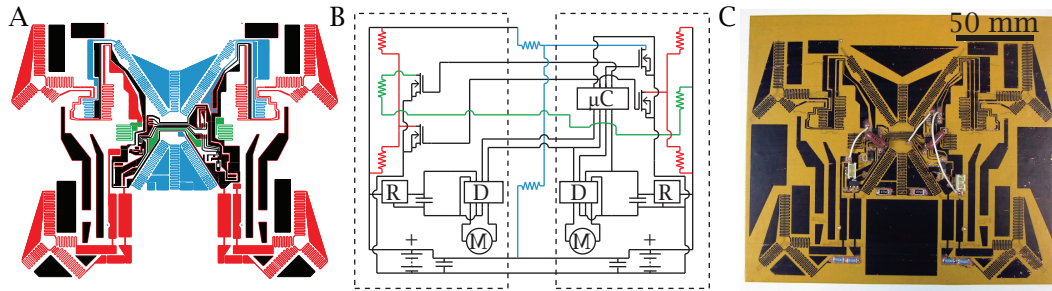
The electrical circuit of the self-folding robot. The crawling machine uses a flexible printed circuit board (PCB) integrated into the laminate to control both assembly and locomotion. (A) The trace pattern of the machine's PCB. Red, blue, and green traces indicate the current path during activation of the first, second, and third folding steps, respectively. (B) The machine's circuit diagram, including one microcontroller (μC), two motor drivers (D), two voltage regulators (R), two motors (M), two batteries, and four MOSFETs. (C) The flexible PCB layer of the machine, with all electrical components installed.
